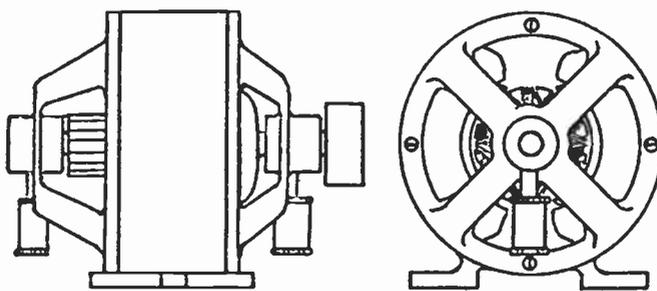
Side and End Views of 30-Watt Generator as it Appears when Completed.
